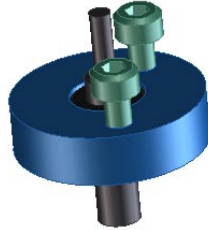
Recommendation on Customer Base Plate, Bearings and Shaft for shaft size beyond 4 mm diameter.
